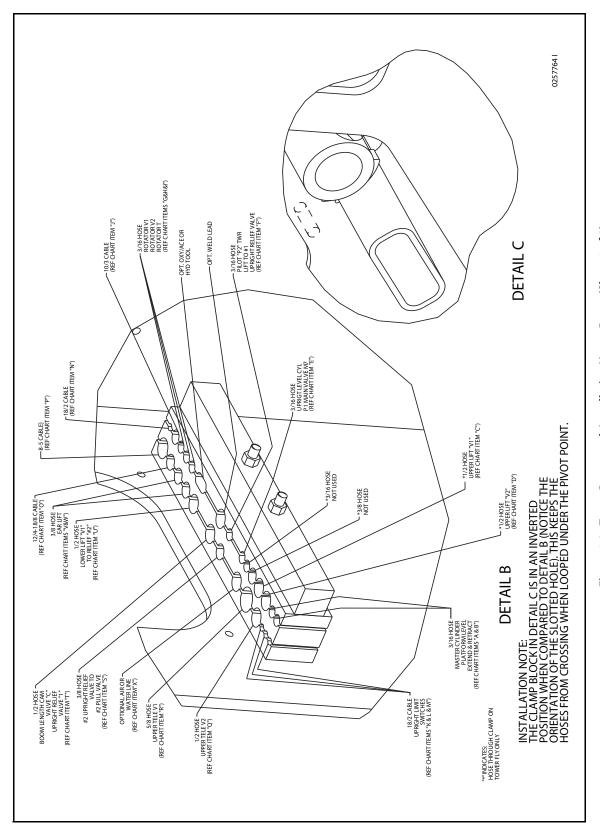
Tower Powertrack Installation Upper Boom (Sheet 1 of 2)
